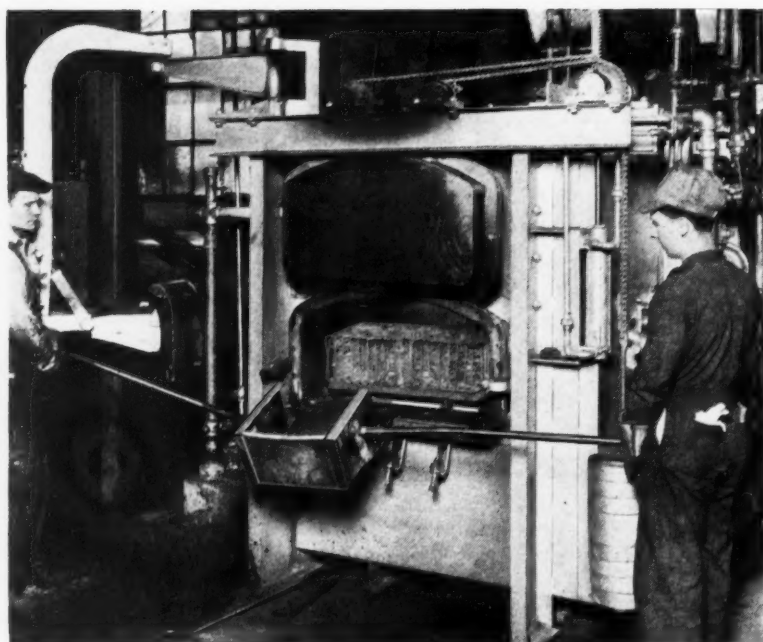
Operators Removing Work from a Batch Type Eutectrol Carburizing Furnace
